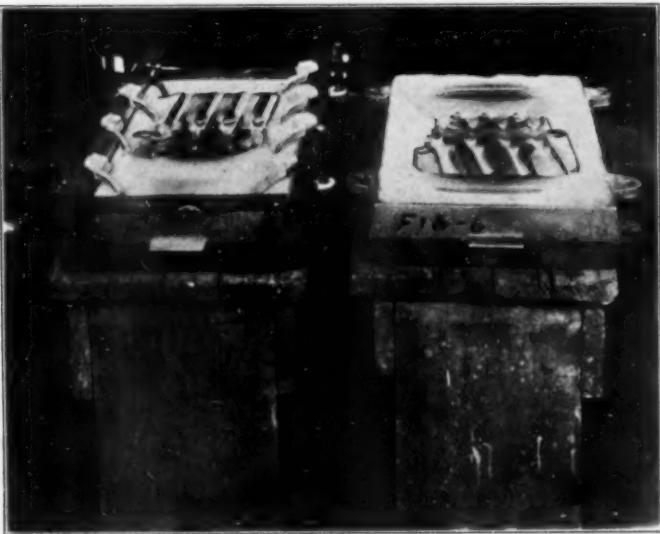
A MOLD IN COURSE OF CONSTRUCTION.
